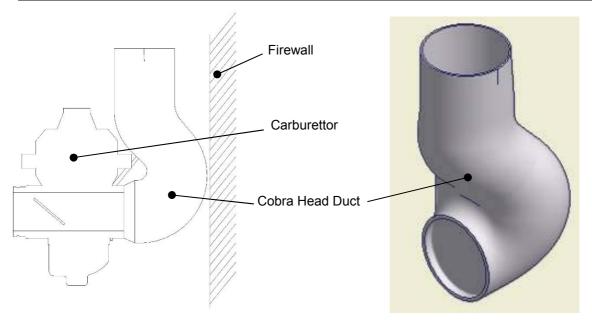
Cobra Head for Installations with Minimum Carburettor Clearance
